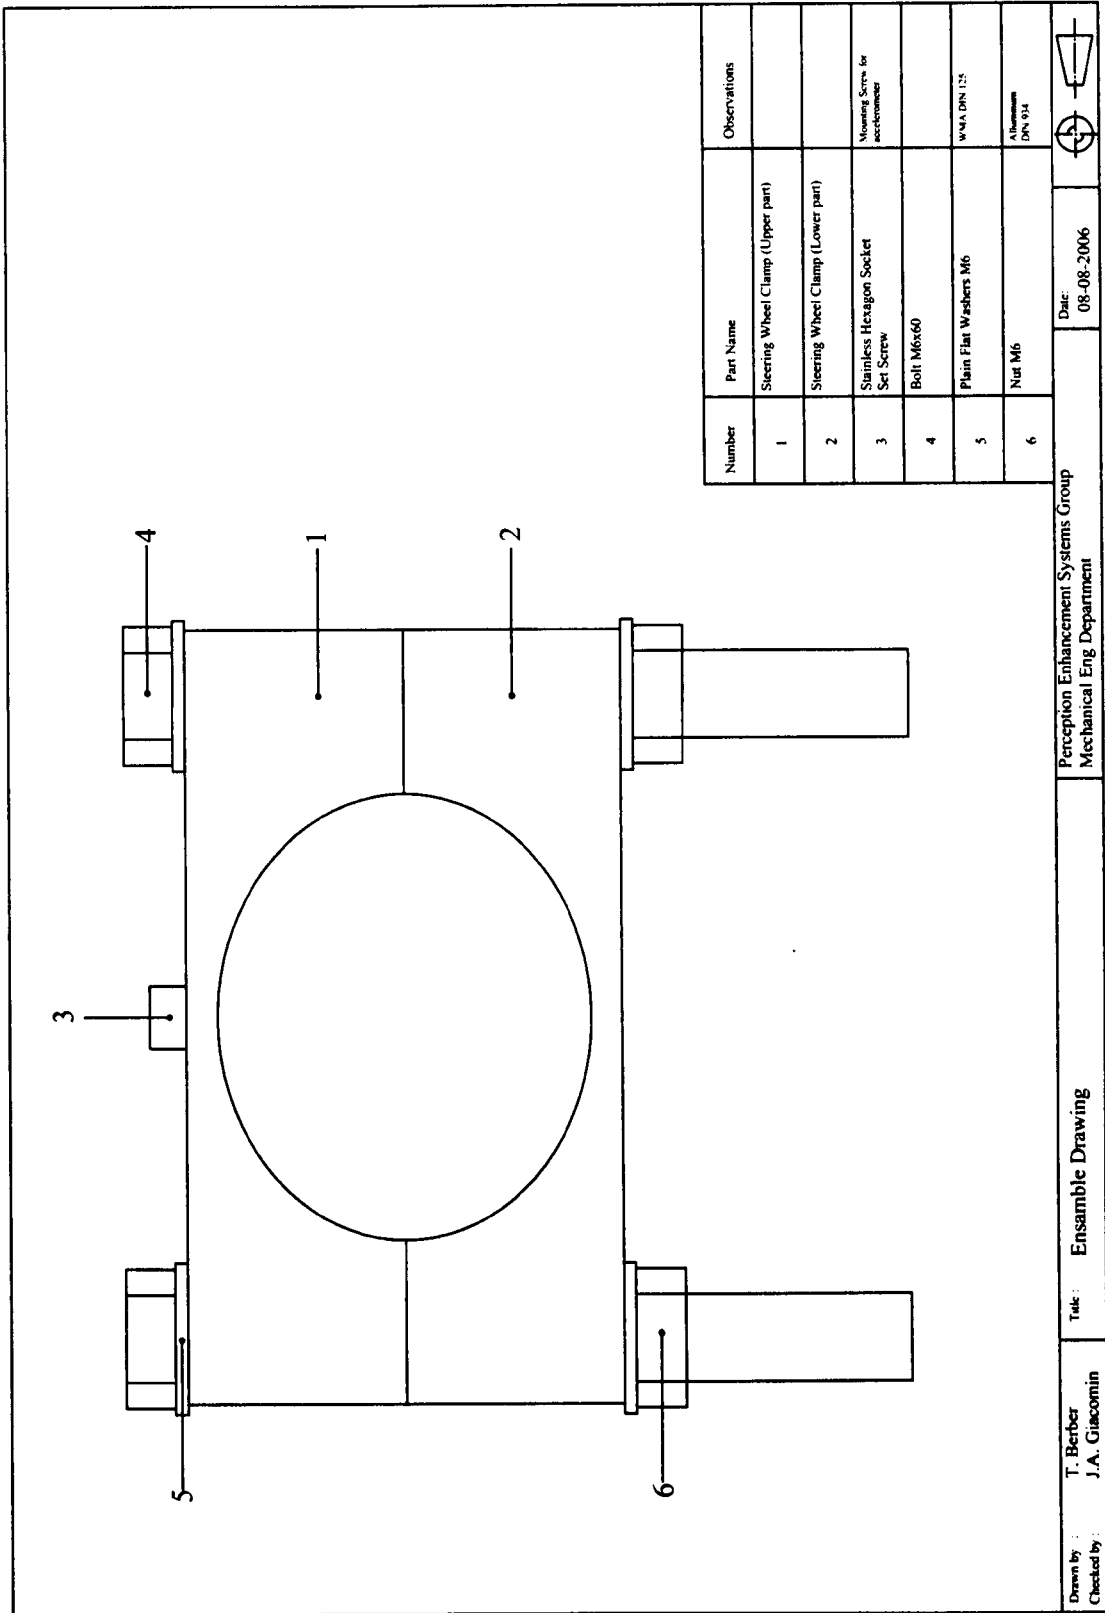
Ensemble drawing of the steering wheel clamp used to measure the steering wheel vibration for the Uxbridge test.
